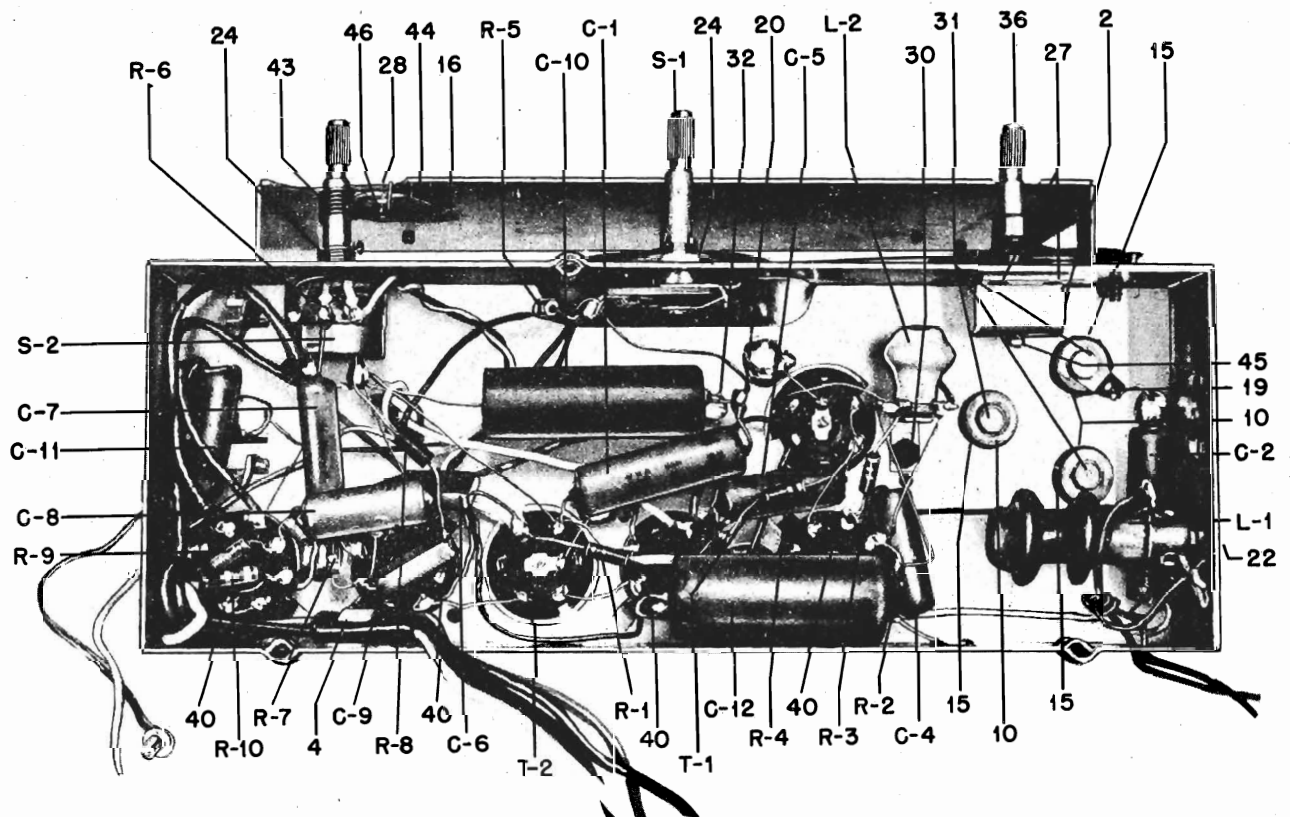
PARTS LOCATION - CHASSIS BOTTOM
